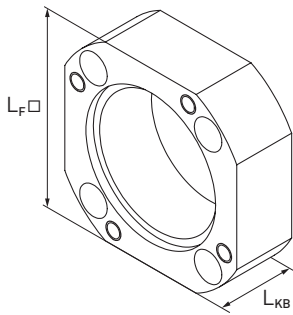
Coupling housing KB for linear modules HM-B and cantilever axes HC
